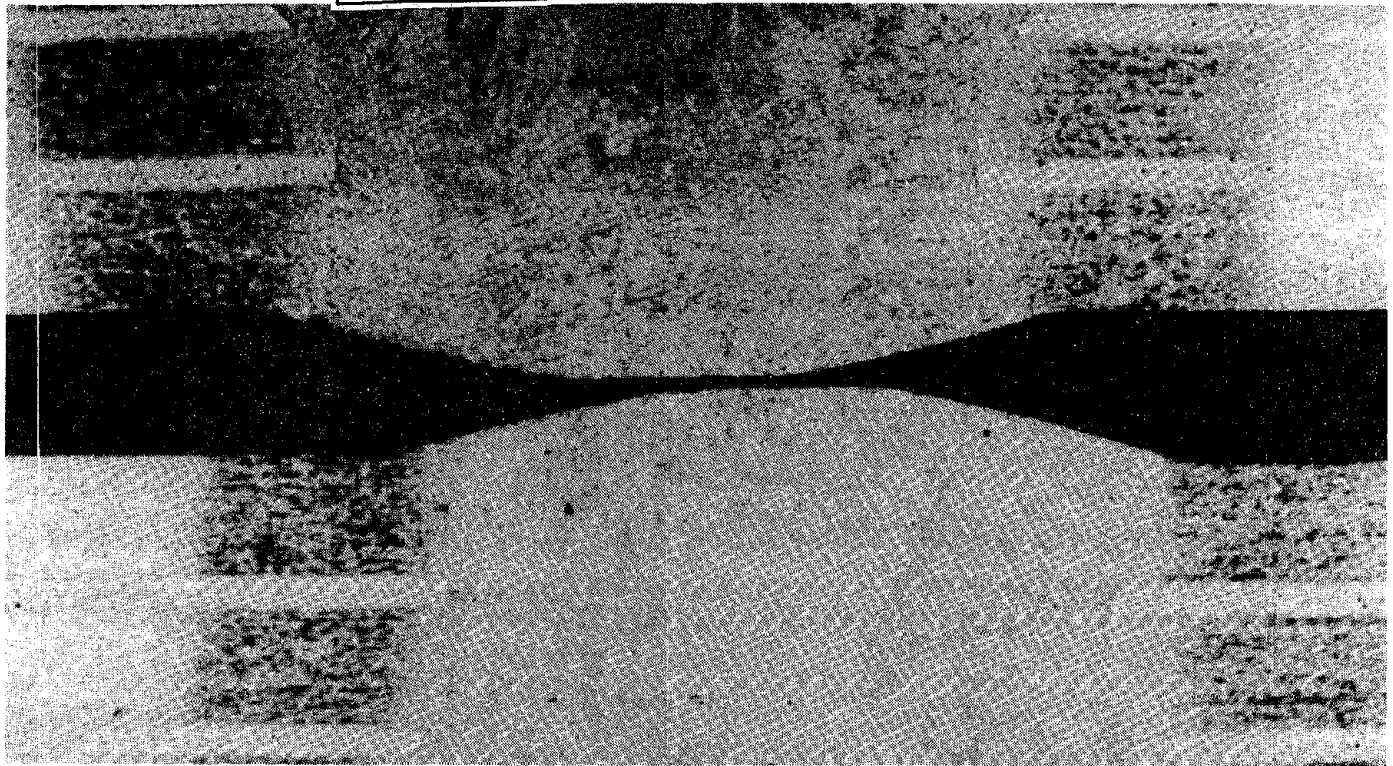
Weld in 0.008 In. Interlayer Laminate Aluminum Plate (20X Magnification)
